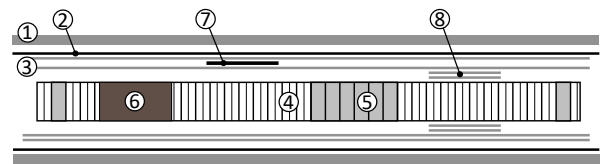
Raw panel with different inserts and inlays: (1) aluminum plate, (2) release film, (3) prepreg layers, (4) honeycomb core, (5) potting compound, (6) FRP-insert, (7) metallic inlay, (8) prepreg doubler
